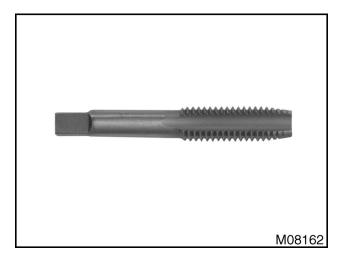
ZTSE4744 Cylinder Head Bolt Tap
